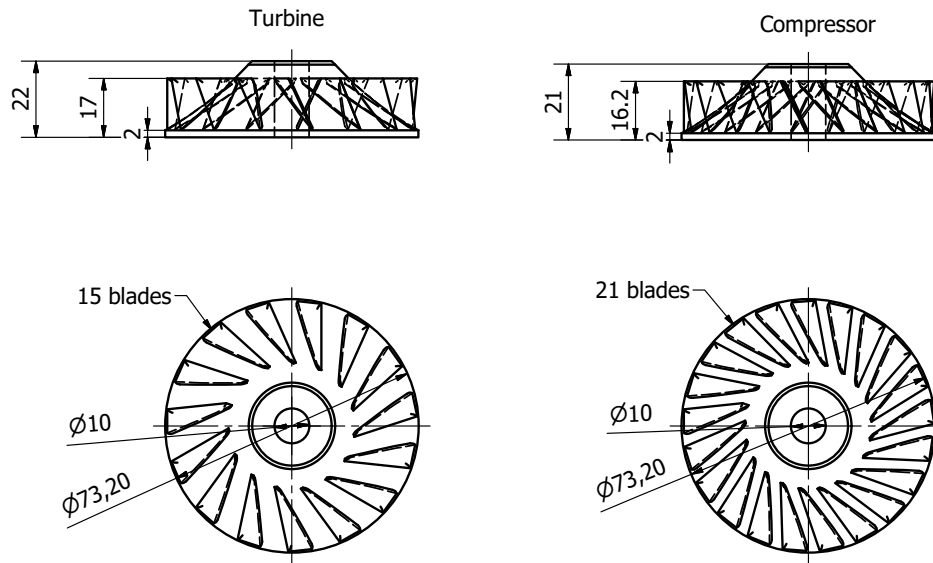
Drawing of the turbine and compressor rotors illustrating the main dimensions and the number of blades. Dimensions are in millimeters. Note that the stators are omitted as they have not yet been fully designed for the compressor. Additionally, the blade design itself is not finalised.
